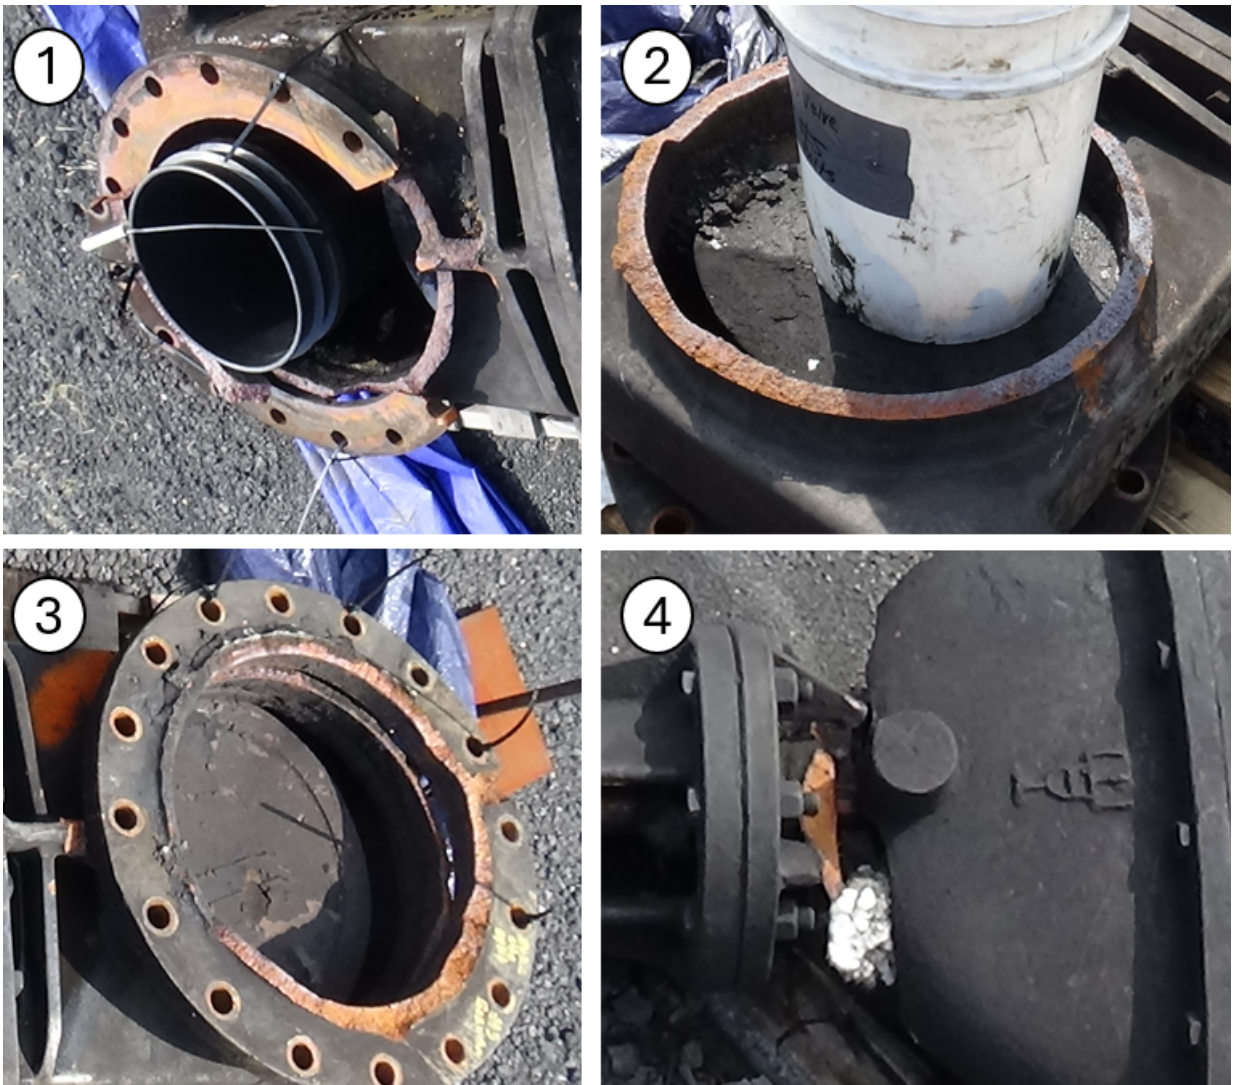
Damaged valves recovered after the incident: (1) portion of flange broken; (2) complete flange separation from valve body; (3) complete flange separation from the valve body; (4) fracture at the top of the bonnet. (Credit: CSB)
